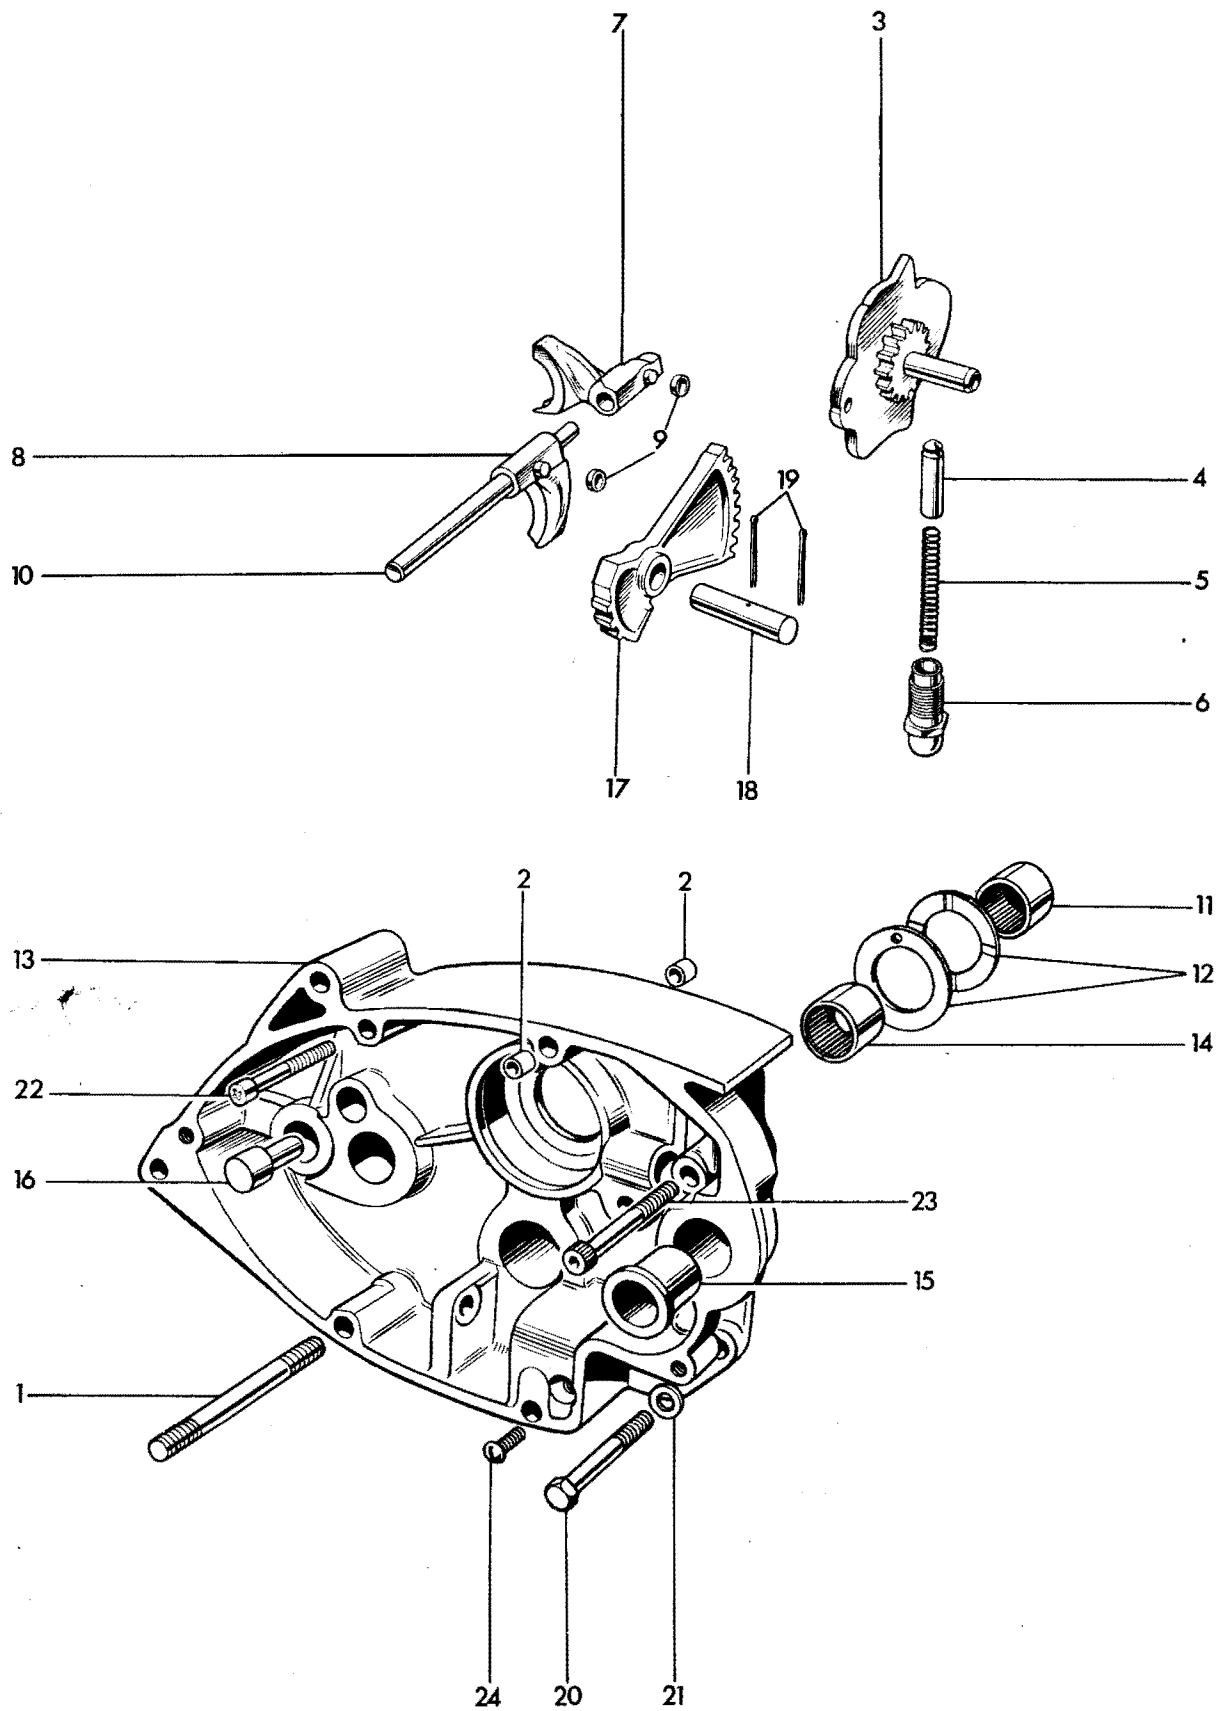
GEARBOX INNER COVER AND SELECTORS
